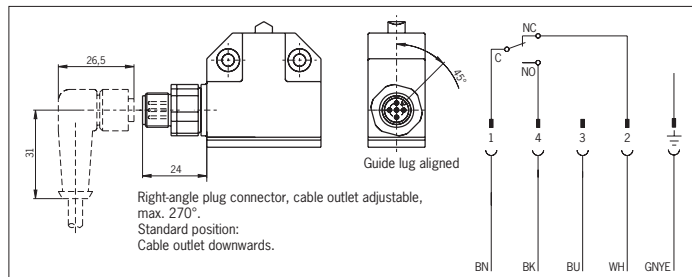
Dimension drawing/connection diagram of N01.550/562SVM5 with plug connector M12 (SVM5, 5-pin)
